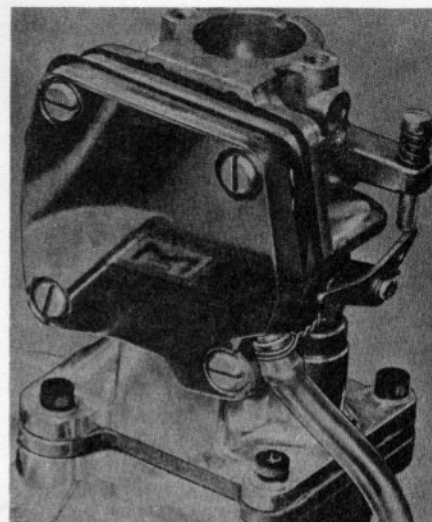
Always secure fuel tube with wire at each end as shown.
